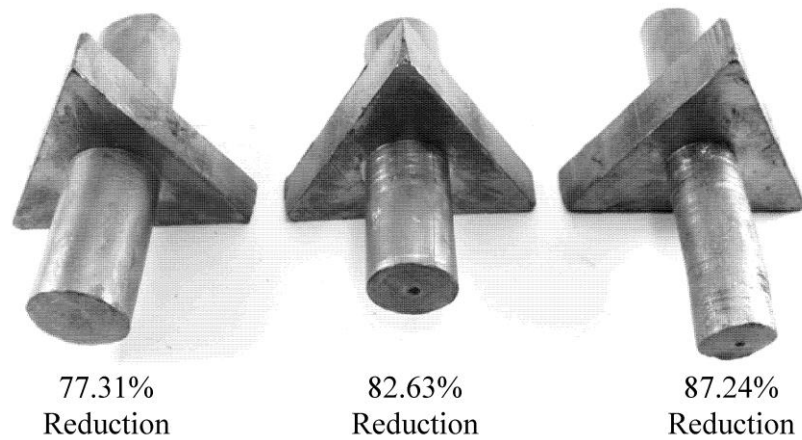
Extruded forward-backward extrusion-forging triangular head shaped product
